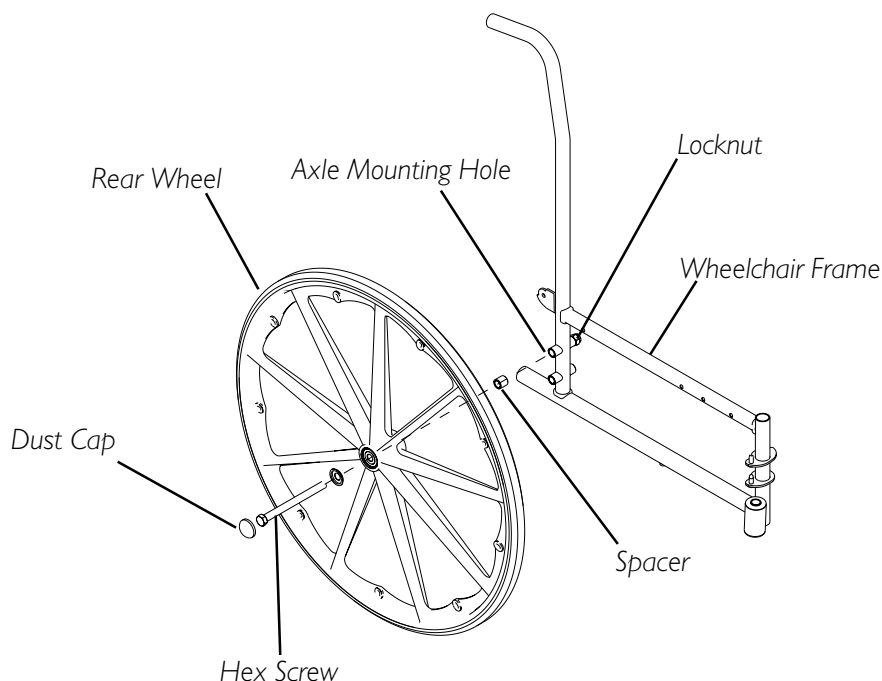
REMOVING/INSTALLING THE REAR WHEELS
